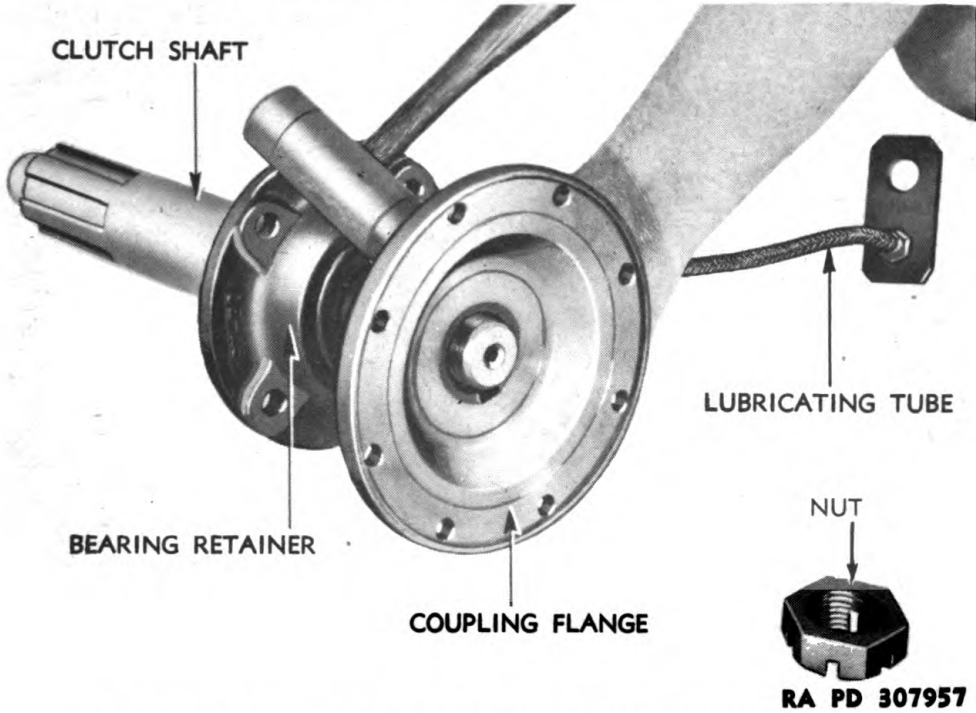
Removing Universal Coupling Flange From Clutch Shaft
